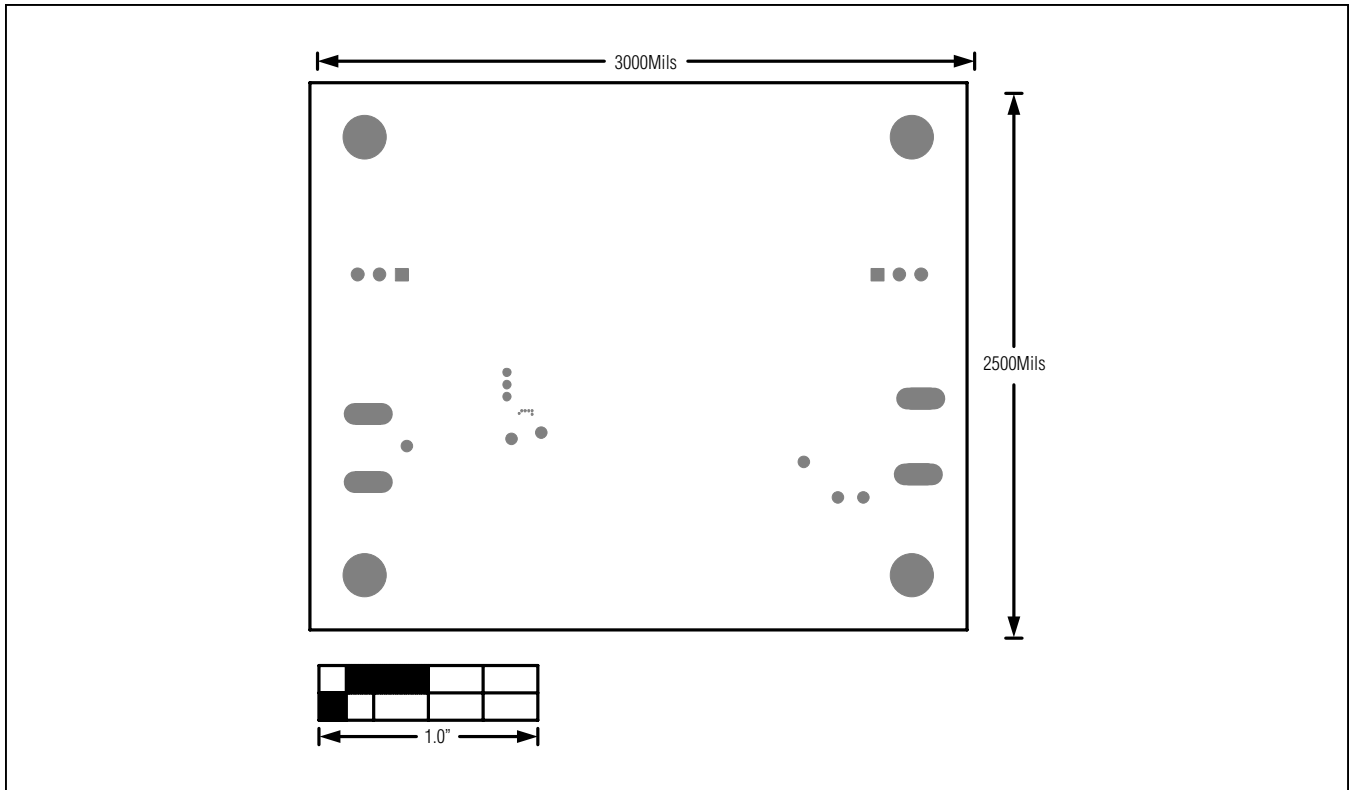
MAX8969 EV Kit Component Placement Guide—Solder Side
